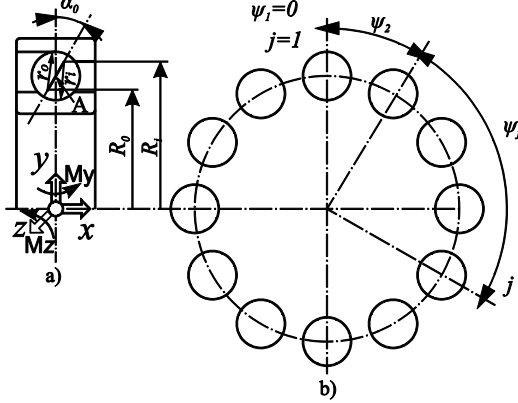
Schematic of ball bearing. (a) Parameters of a ball bearing. (b) Angular position of the ball
